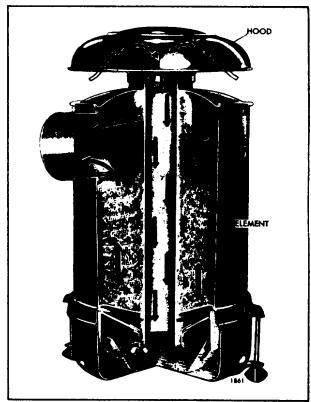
Heavy-Duty Oil Bath Air Cleaner
